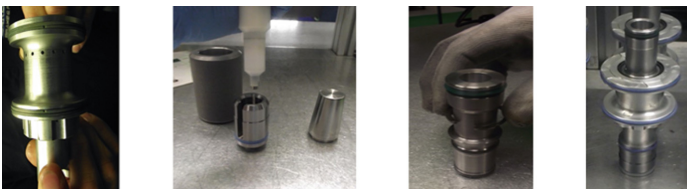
From left to right: piston, piston extension, plunger, full assembly (piston tower)
